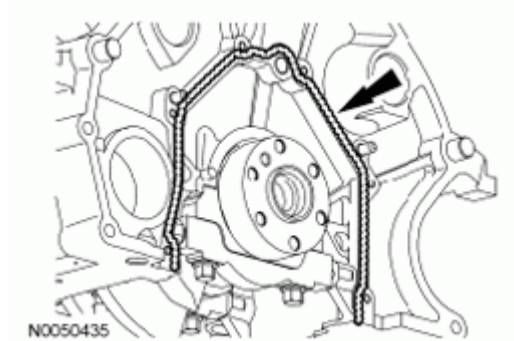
Identifying Crankshaft Rear Seal Retainer Plate Mating Surface Gasket Maker Applying Area
